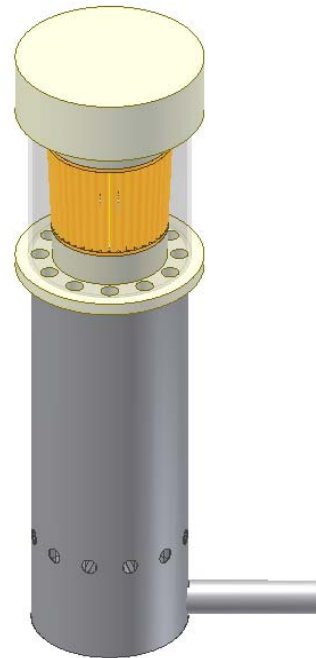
Perspective view of the burner / emitter / recuperator subassembly.
